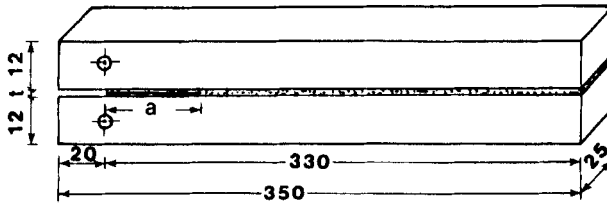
Flat ASTM standard specimen. All dimensions are in mm.
